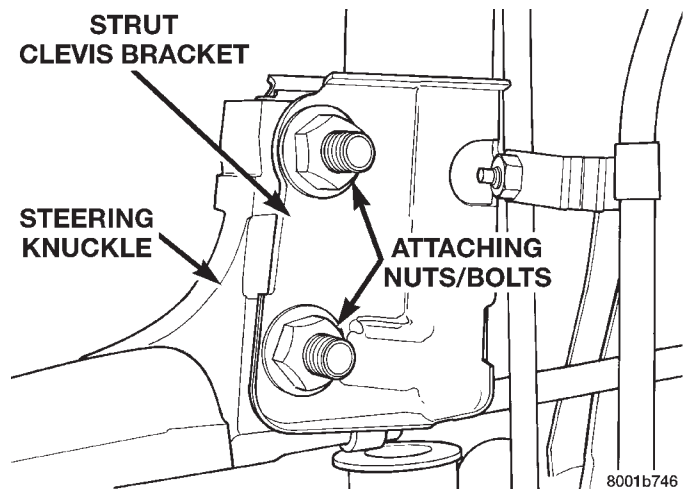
Strut To Steering Knuckle Attaching Bolts
